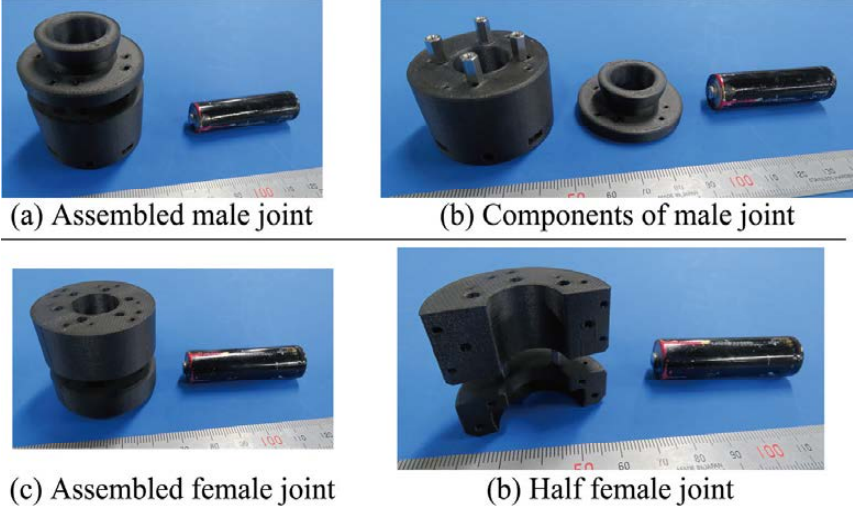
Male and female joints of the proposed mechanism. The diameter of these joints is 40 mm. The inner radius of joints is 8.0 mm.
